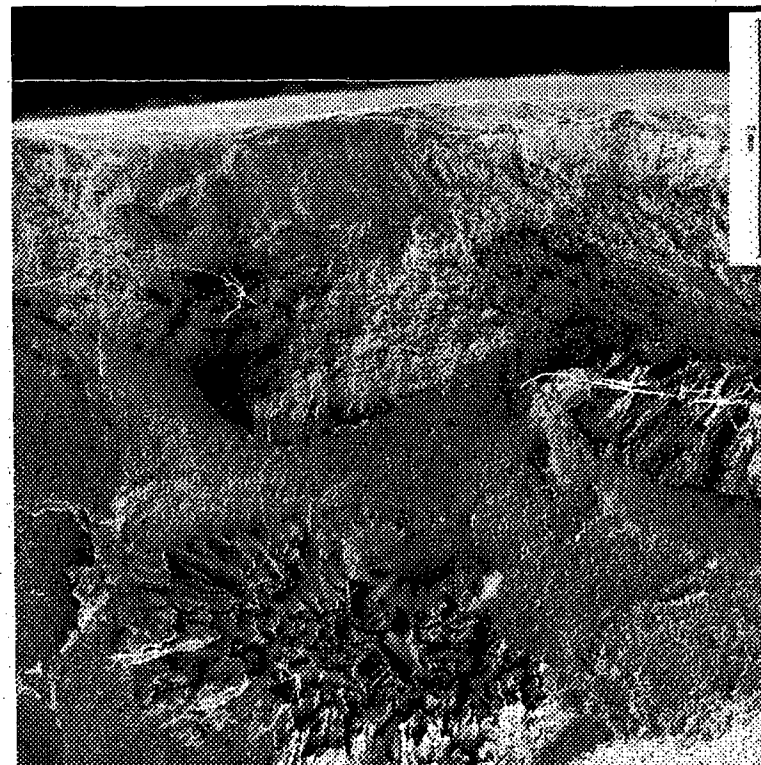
Lower Magnification SEM Fractograph of Freshly Opened Crack at 270° Orientation – Showing the Carbon Steel Face with Islands of Weld Metal
